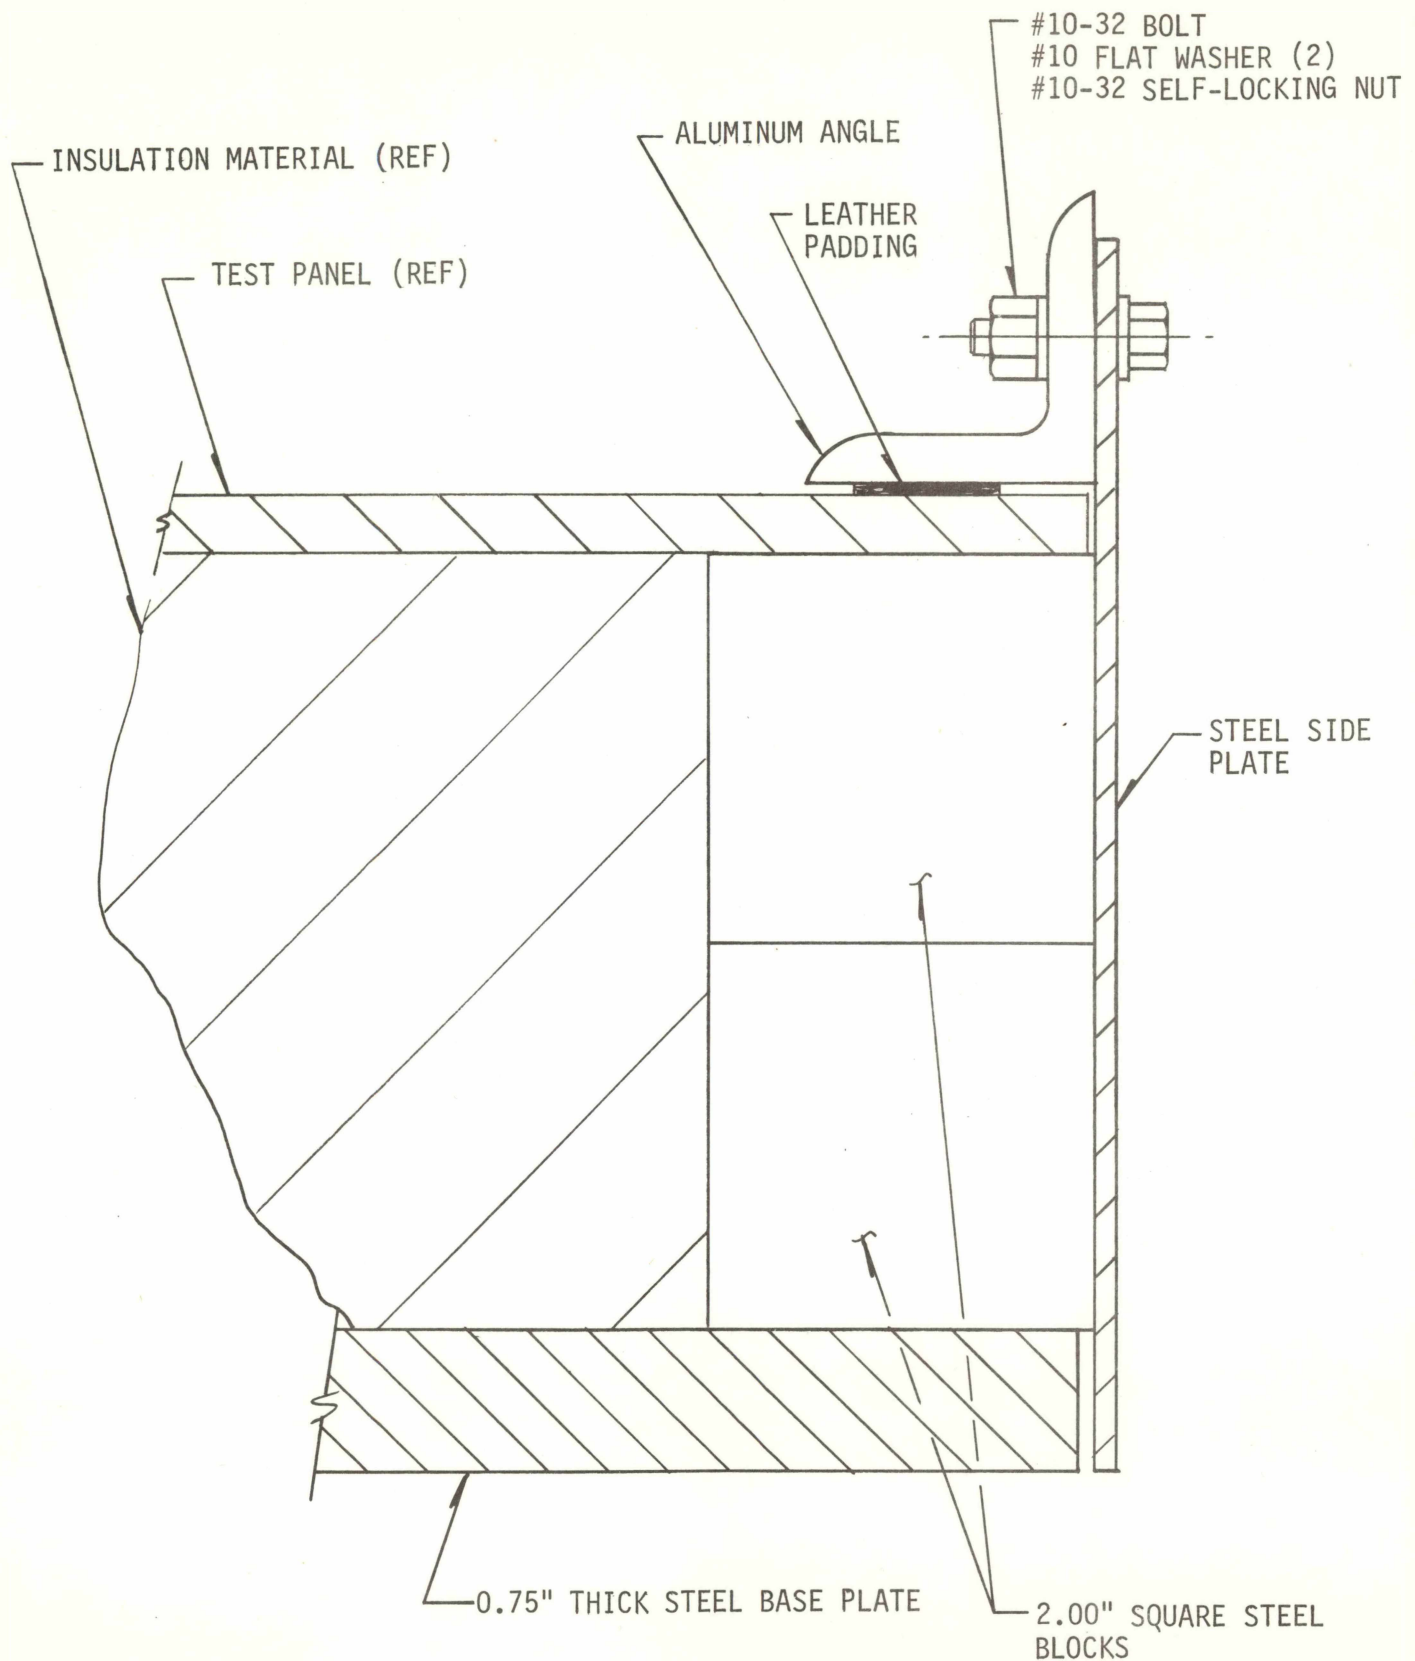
SECTION THROUGH TEST SPECIMEN HOLDING FRAME
